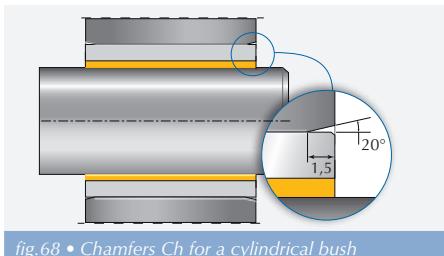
• Chamfers  $Ch$  for a cylindrical bush
